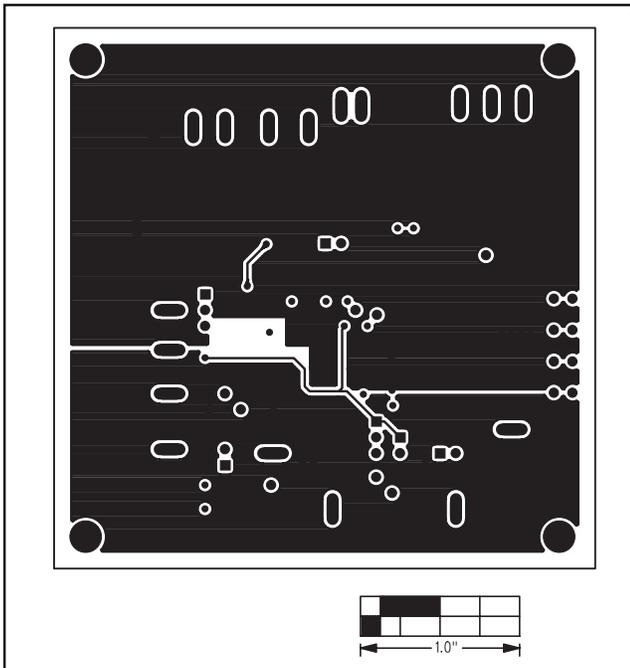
MAX1908 EV Kit PC Board Layout—Signal and Ground Layer
